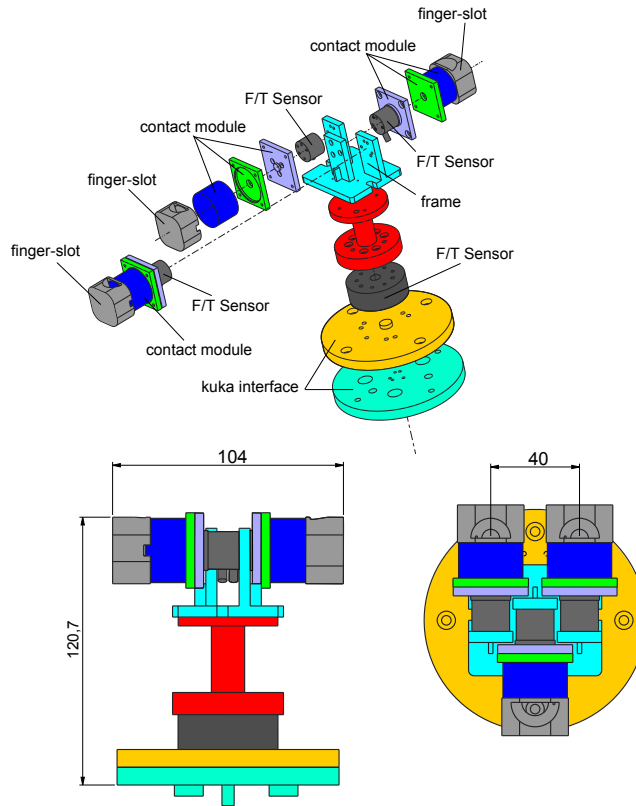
Exploded drawing view of the Tripod Device and its main features with dimensions in [mm].
